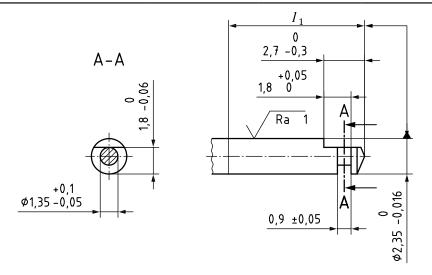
Dimensions, tolerances and surface roughness for Type 1 shank
